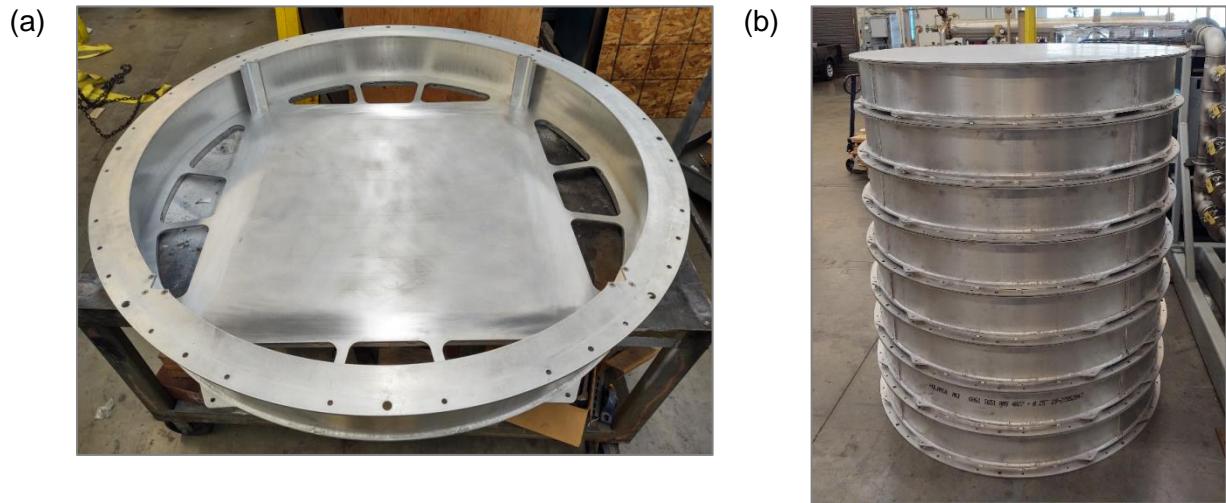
(a) A top view of a single planar module housing and (b) a stack of eight housings.
